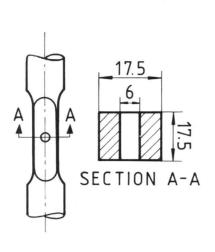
Test bar used for straining and fatigue testing. During testing a hardened pin is shrink fitted into the cylindrical hole.
